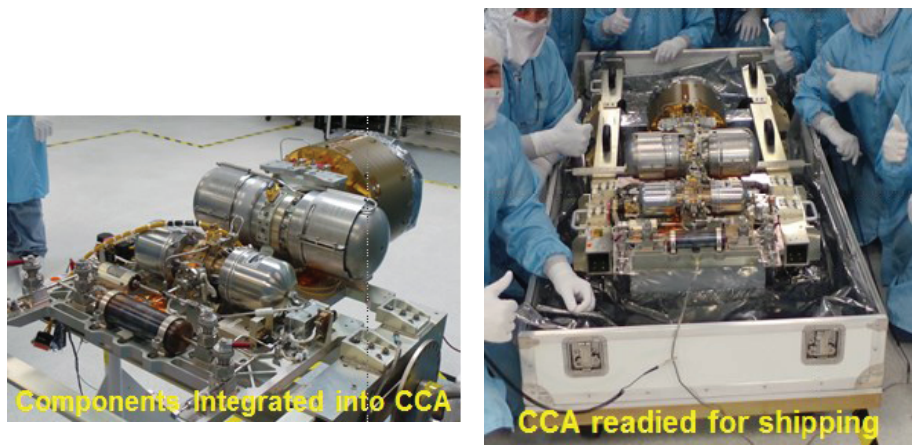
MIRI Cryocooler Compressor Assembly integrated and ready for shipping.
